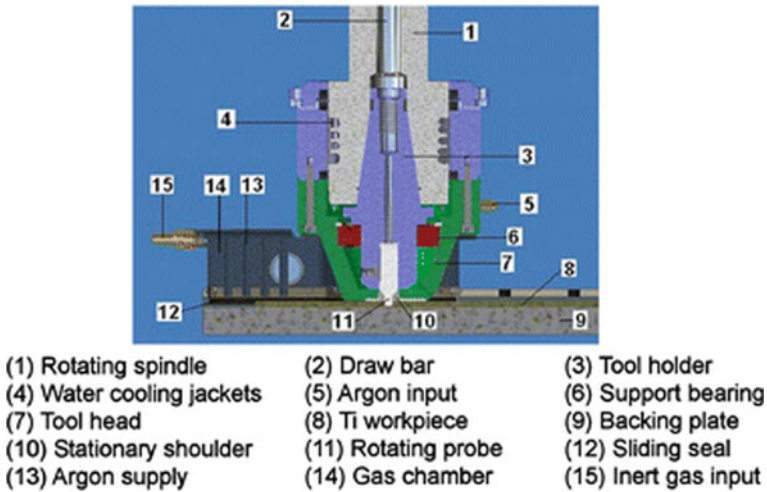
A cross-sectional view of the SSFSW₂ assembly [18]
